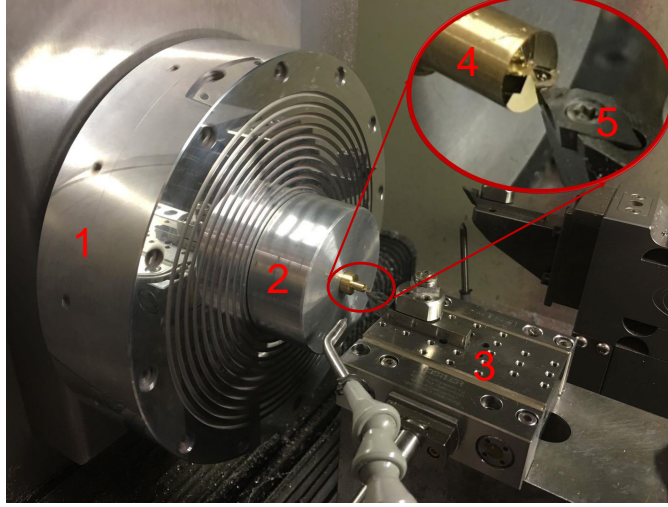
Photograph of the cutting system with: 1. spindle, 2. fixture for the workpiece, 3. three-axial dynamometer, 4. brass workpiece, and 5. diamond cutter.
